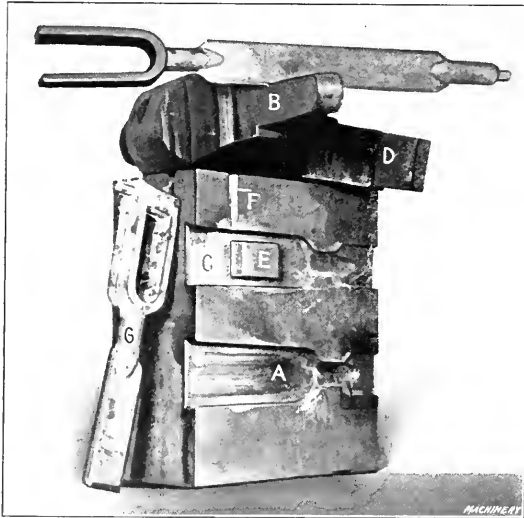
Dies and Tools used in making Spring Hanger shown at B in Fig. 70—also illustrating Pin Welding Operation
